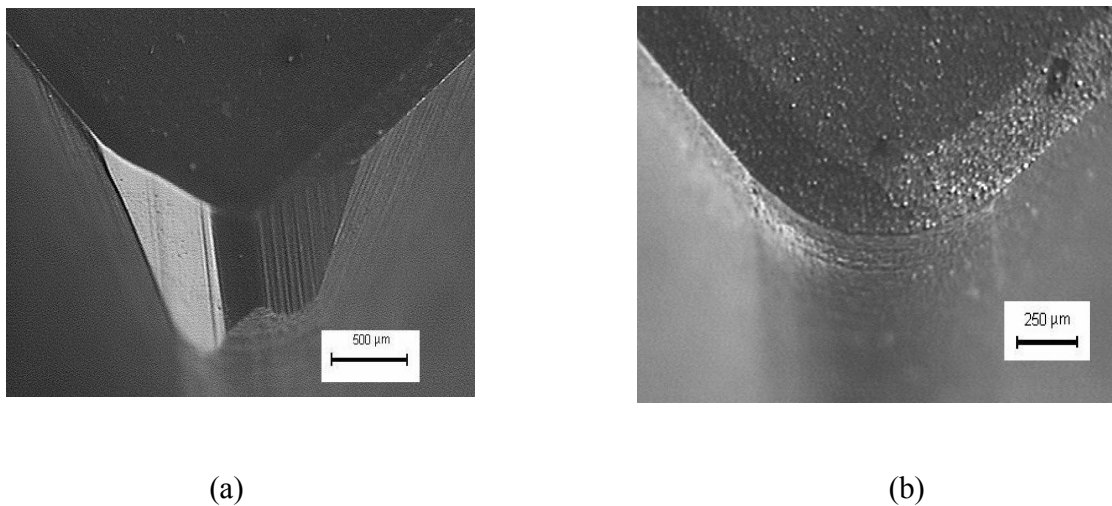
SEM micrographs of the cutting tools edges after machining to  $V_c=600$  m/min: a) uncoated cutting tool, b) diamond coated cutting tool.
